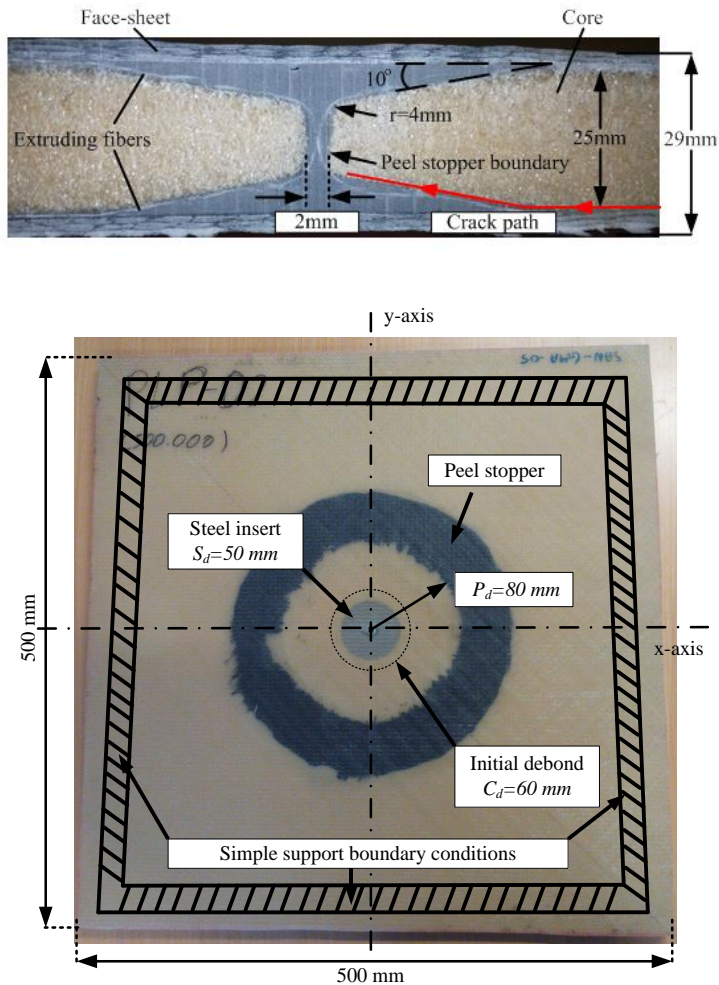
Layout and dimensions of foam cored sandwich panel test specimens with embedded PU peel stopper, [56].
